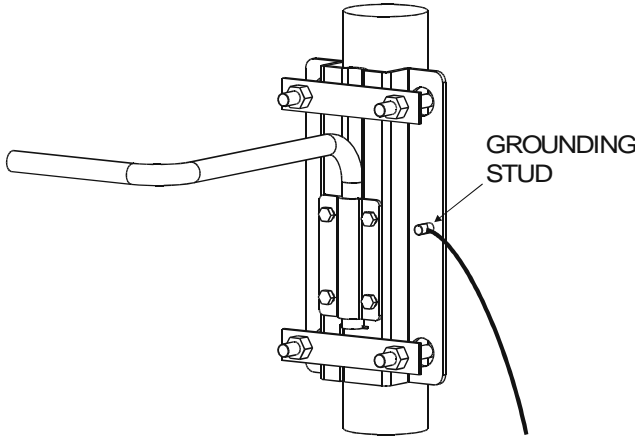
xDR232 Bracket and Grounding Stud Location
